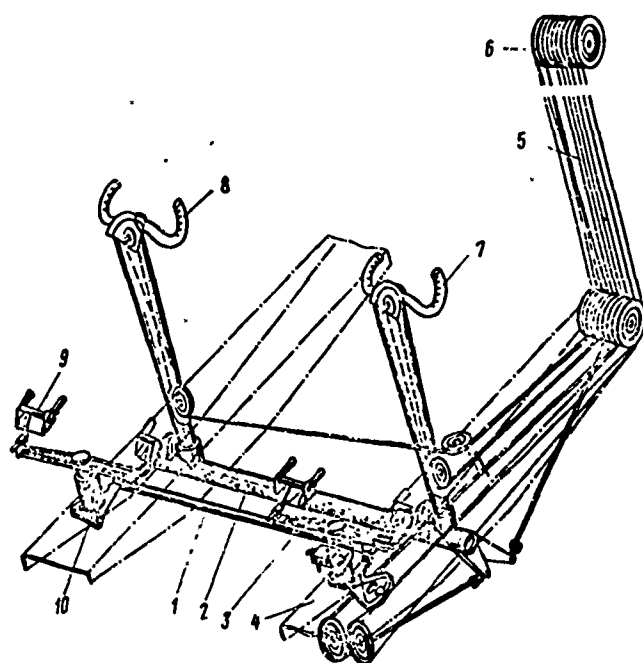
Control wheel assembly: 1 - rod; 2 - cross tube; 3 - lever; 4 - load-bearing beam; 5 - cables; 6 - rollers; 7 - left control wheel; 8 - right control wheel; 9 - right pedal; 10 - bracket.
